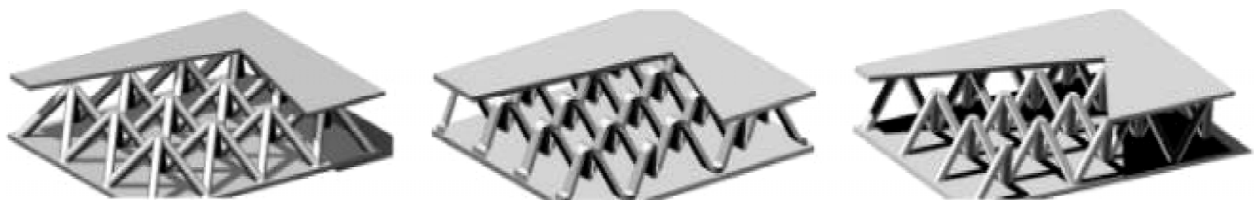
Truss/lattice core sandwich panel (Gu et al., 2020).
